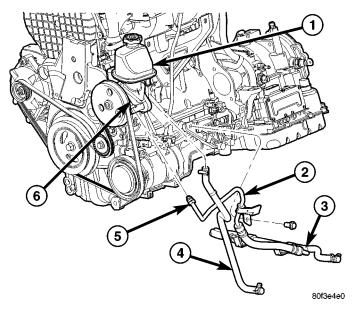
Hoses At Pump And Engine - 2.4L Turbo
